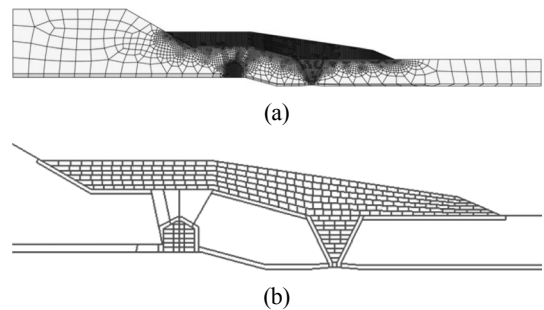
(a) Finite element model for weld overlay analysis and (b) design of weld bead
